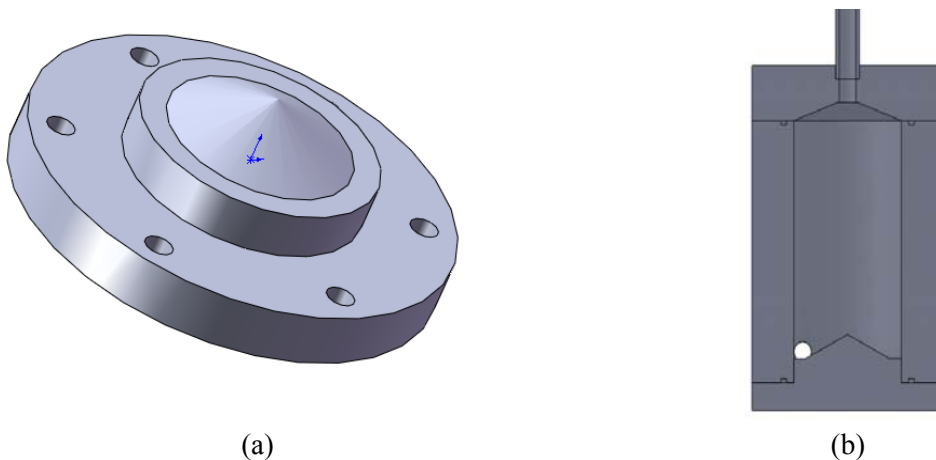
(a) Bottom flange of cyclone, (b) Section view of Cyclone
